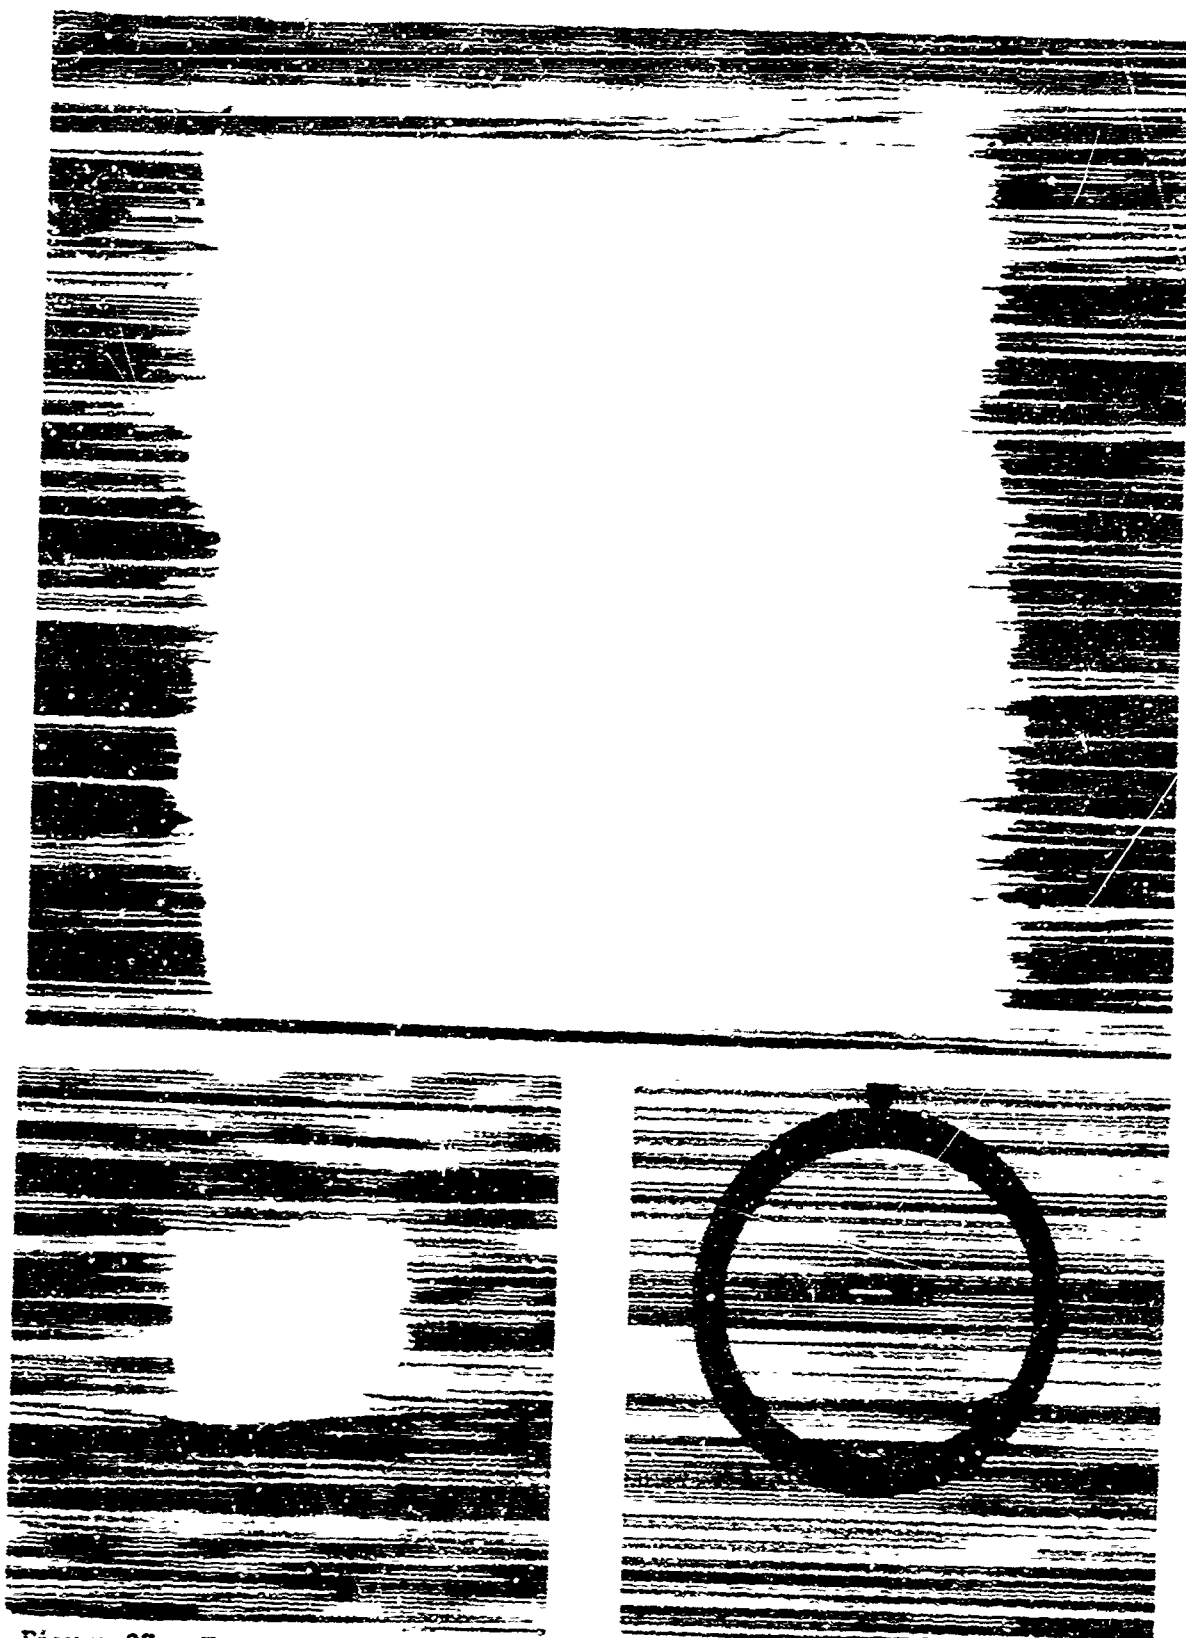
Tungsten-Copper 25BF Radiograph, 5X Photographic Enlargement of Square Defect Sections and Area Containing a Broken Fiber (lower right)
